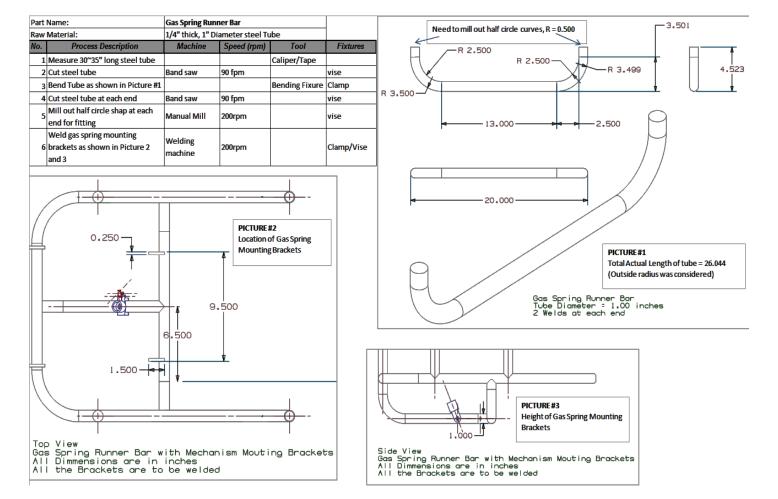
Manufacturing worksheet for gas spring runner bar
